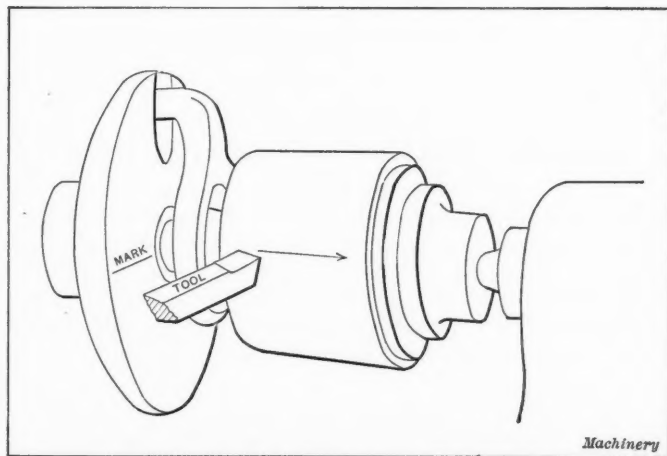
Improved Method of turning and marking Twenty Rings at One Setting
